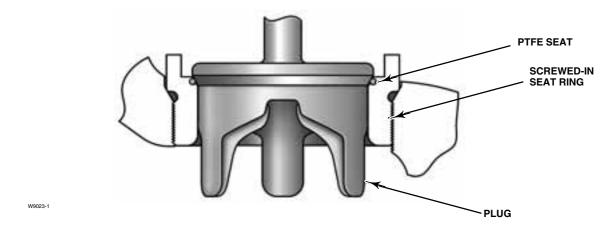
Design GX Control Valve with Typical Soft Seat Trim Construction (Port Sizes of 36 - 136mm)
